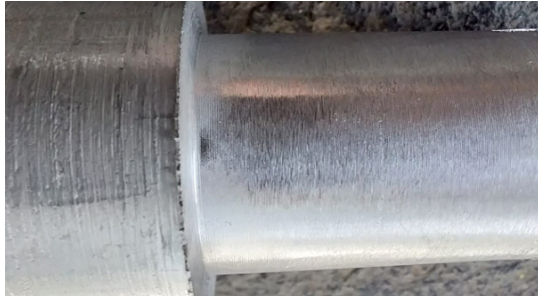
(a) Macro photograph of Machined Specimen P0R0-Ra=14.255 μ
